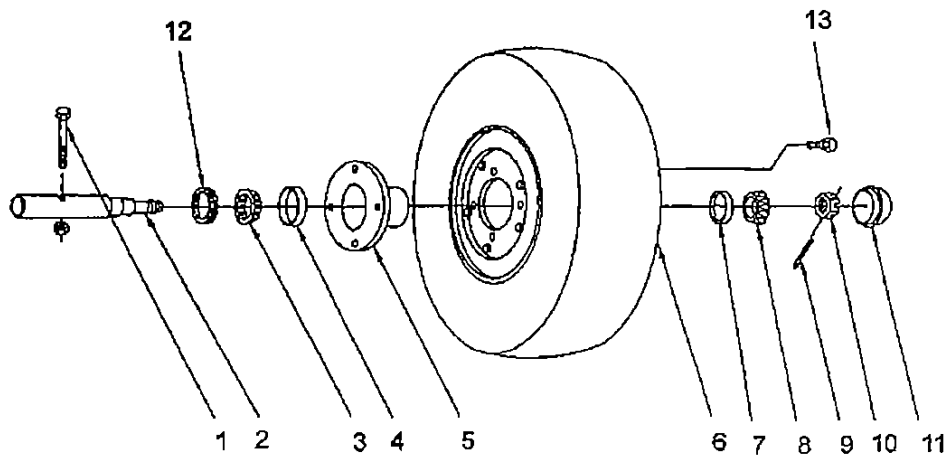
AIRPLANE WHEEL COMPONENTS
